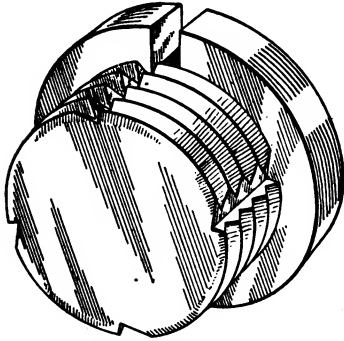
Reamer for Clearing Out Threads of Valve Cap
